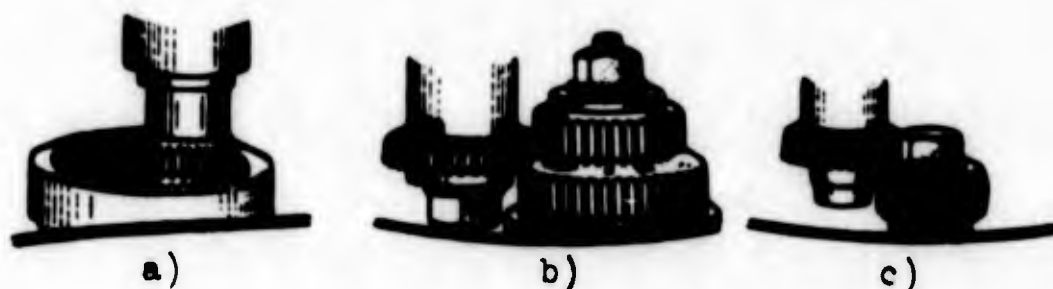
Gear shaping on gear shapers. a-c) internal teeth; b) compound; c) external helical.
